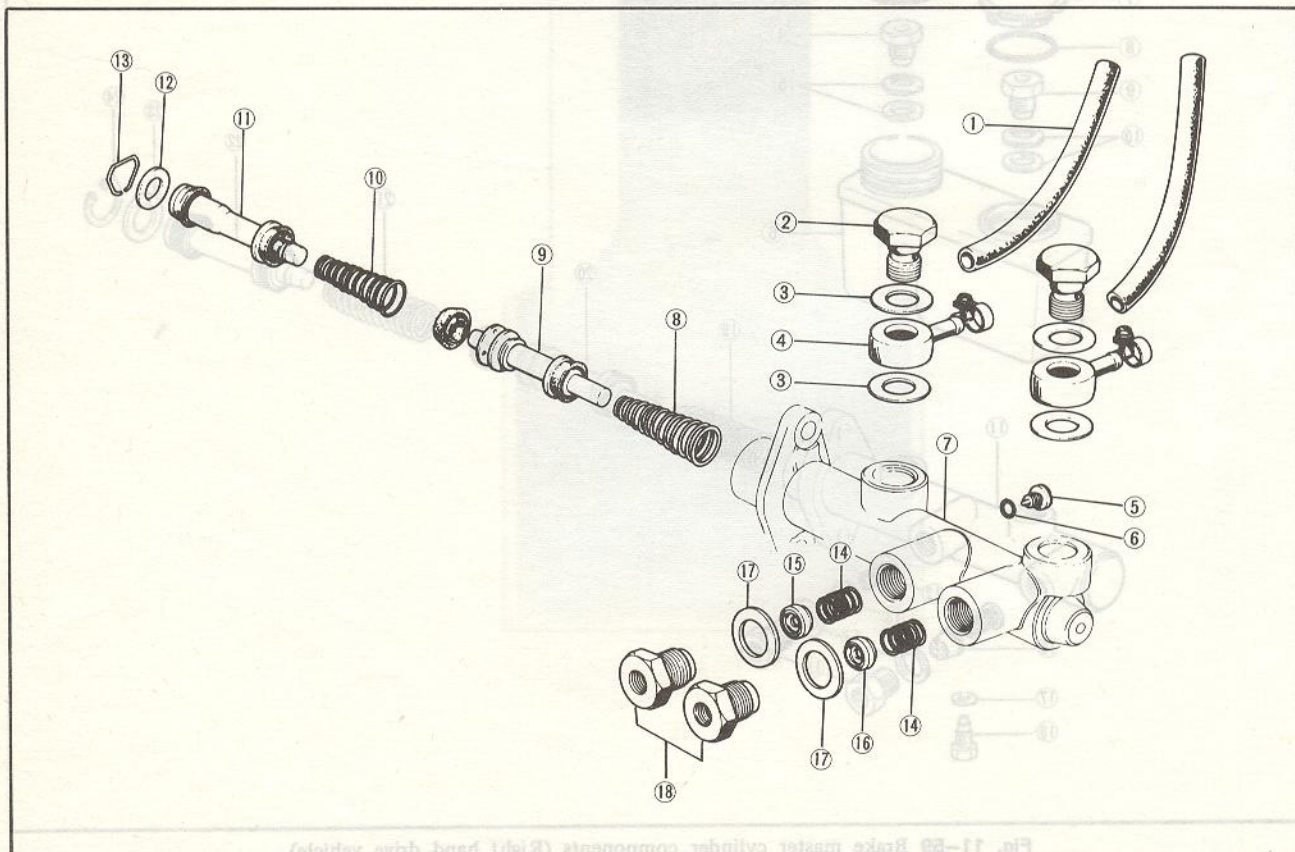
Brake master cylinder components (Left hand drive vehicle)
